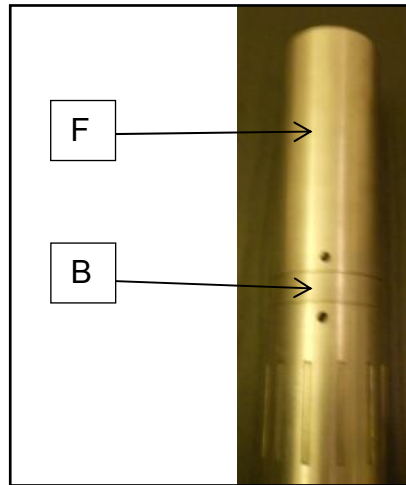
Probe assembly step 5 showing Part F attached to Part B
